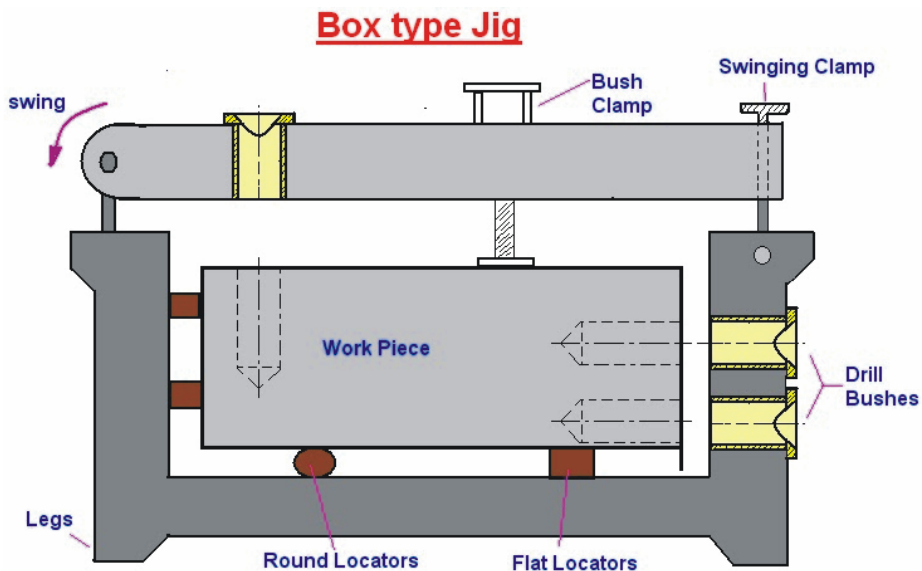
Box type jig which can be used to make holes on two faces of the member simultaneously.
